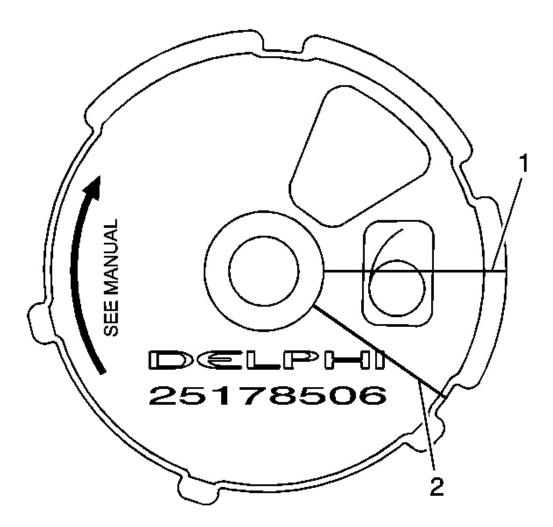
View Of Camshaft Position (CMP) Actuator Full Retard Position Courtesy of GENERAL MOTORS CORP.
